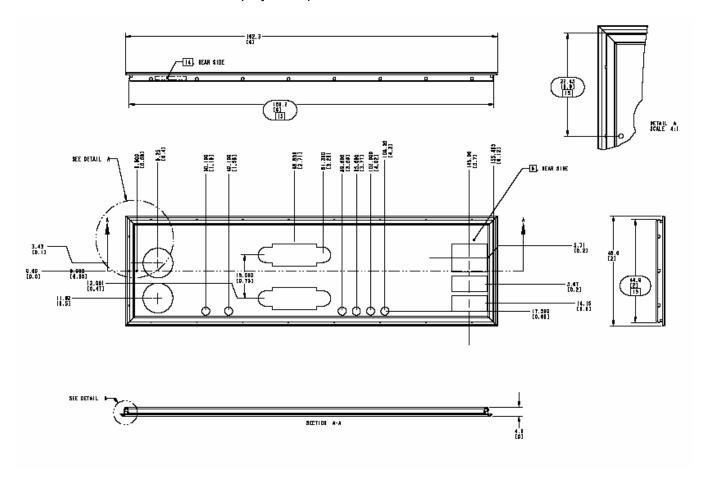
Pedestal Mount I/O Shield Mechanical Drawing for Intel® Server Board S3000AHV
